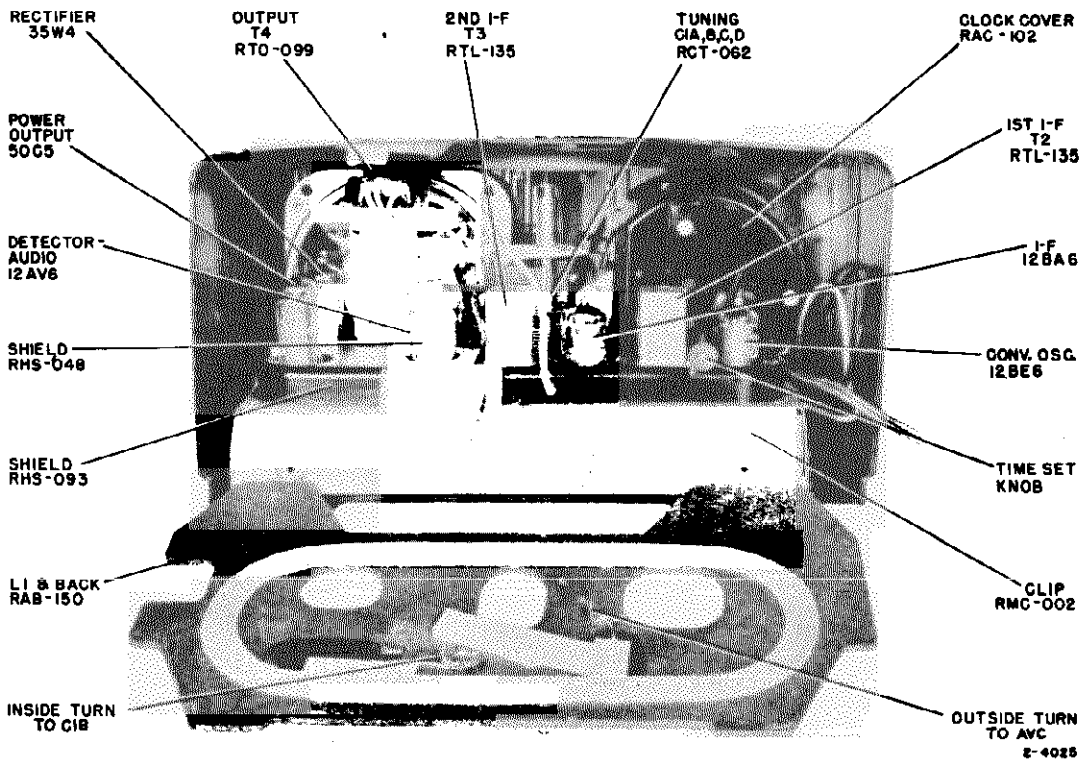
Identification of Components, Models 542 and 543, Rear view
